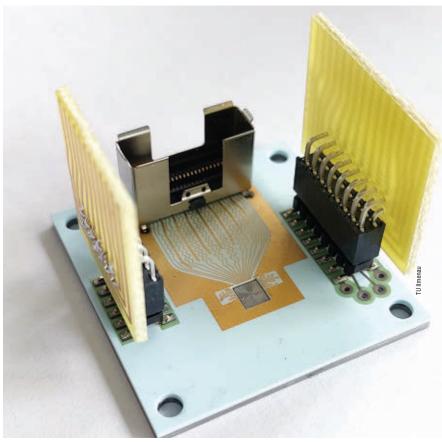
A ceramic printed circuit board (PCB) is bonded to a molybdenum heatsink of a similar size. The PCB carries the VCSEL and driver chip (center). The wings are plugs for thermal management components. The plug in the back will connect to the gigahertz driver signal. See Reference 4.
